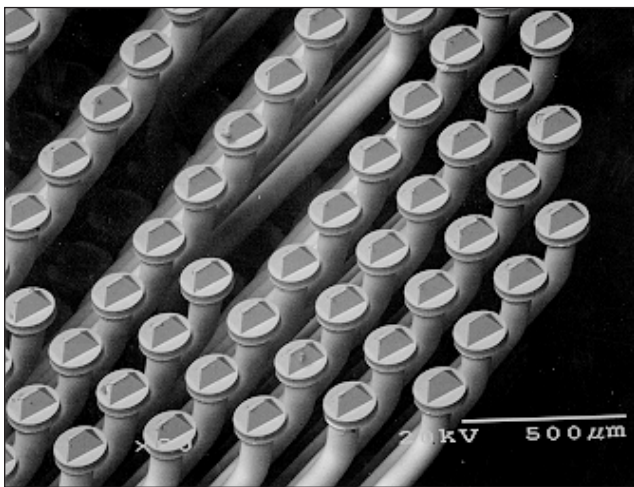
FormFactor has built probe heads suitable for testing microprocessors with C4 solder balls on a 9-mil pitch. Shown here is an array of MicroSpring tips with pyramidal contact surfaces designed for C4-ball connections.
